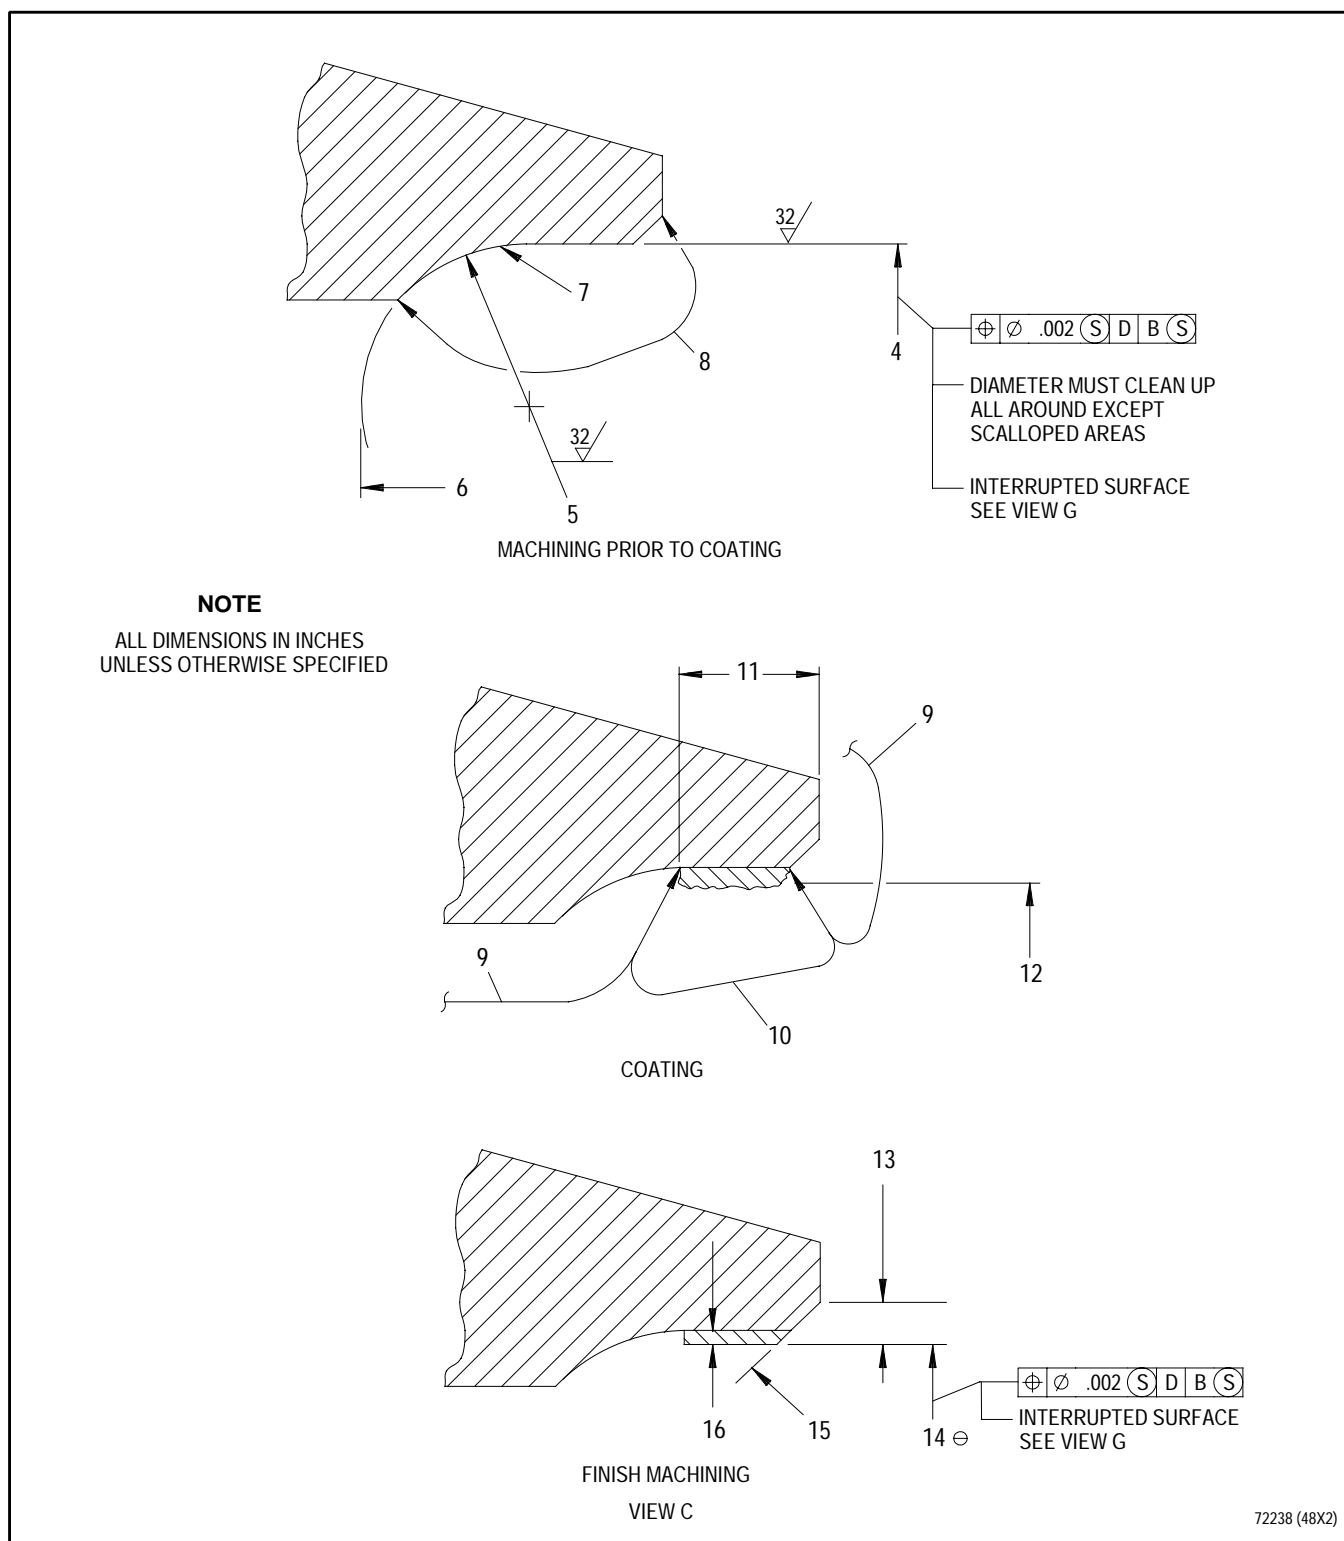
Rear Compressor Front Disk-Drum Rotor Assembly - Snap Diameter Plasma Coat Repair
